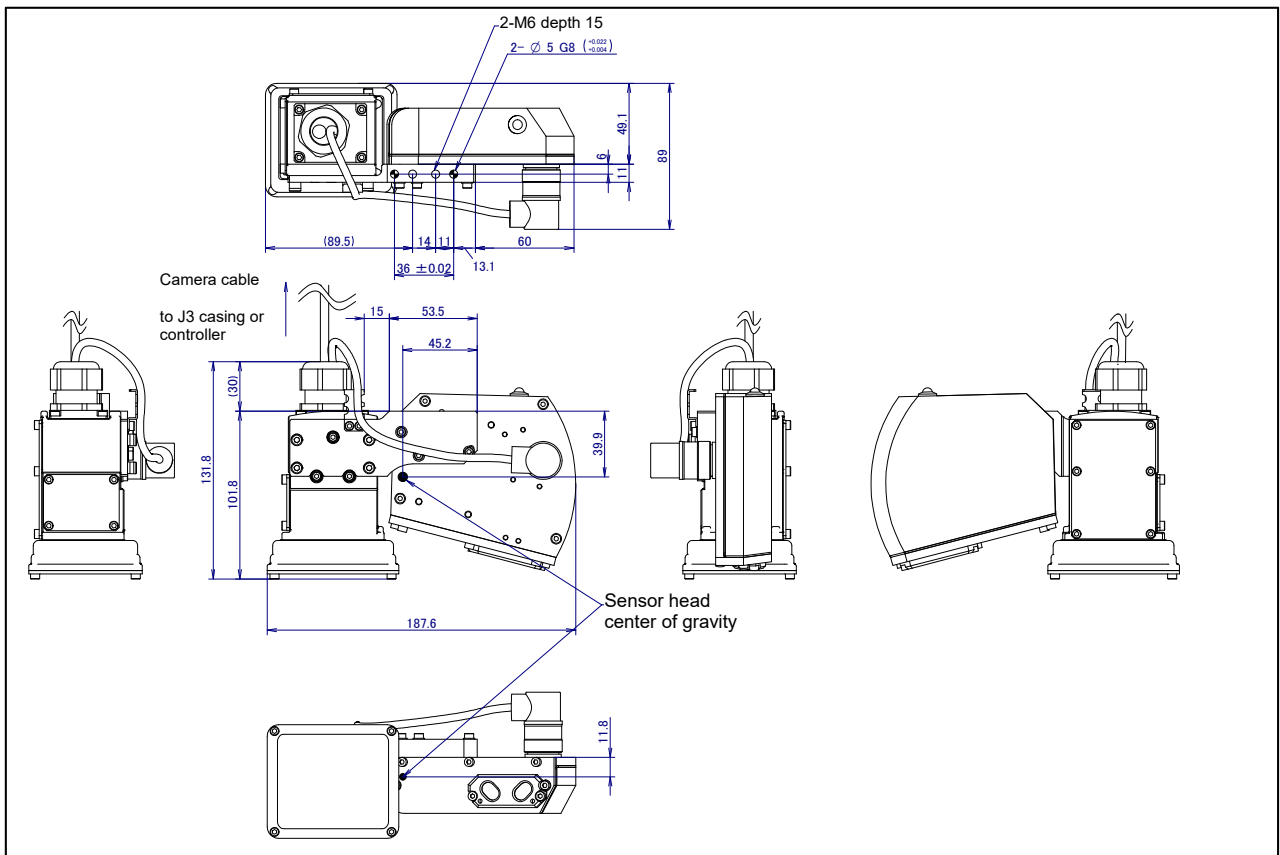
(c) External dimensions of the 3D Laser Vision Sensor Head with LED (stand off 400mm)
